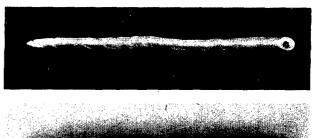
Weld in Vacuum Sintered Pure Mo Welded in Argon. WS158
